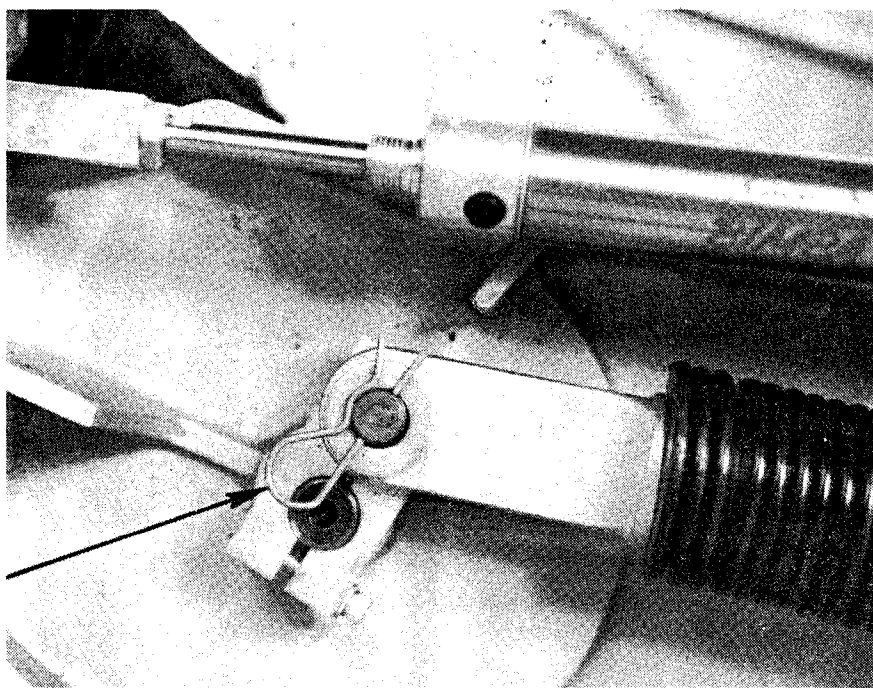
Correct Installation of Mainspring Retaining Pin.
